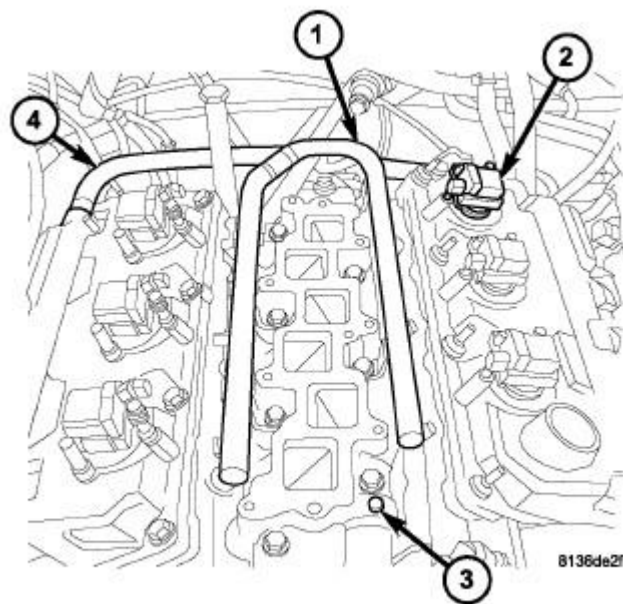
FUEL RAIL AND LOWER INTAKE MANIFOLD
